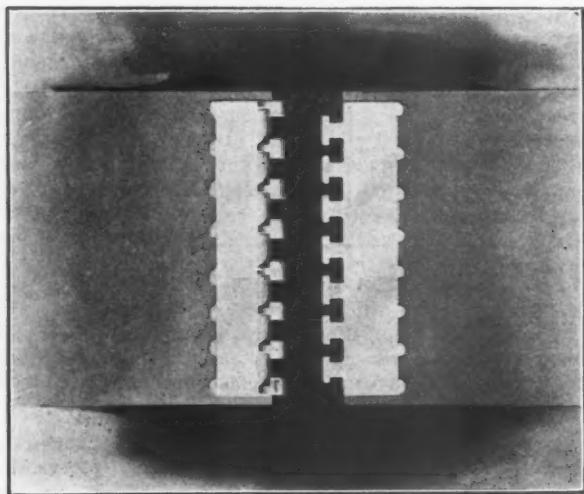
Outside View of the Toscot Flat Flexible Metallic Belt Coupling, Showing the Two Parts Before Hooking.
